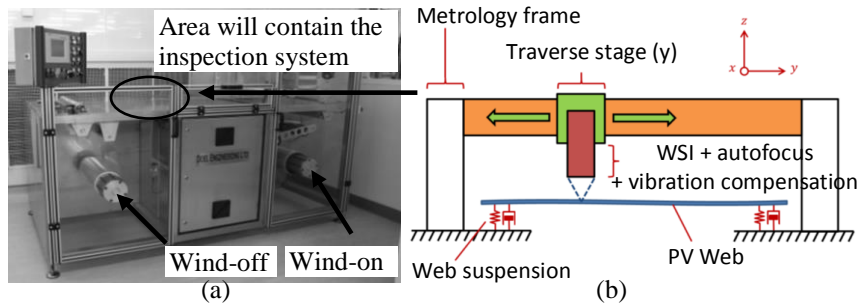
(a) The rewinder/unwinder stand (b) Diagram of opto-mechanical inspection system
